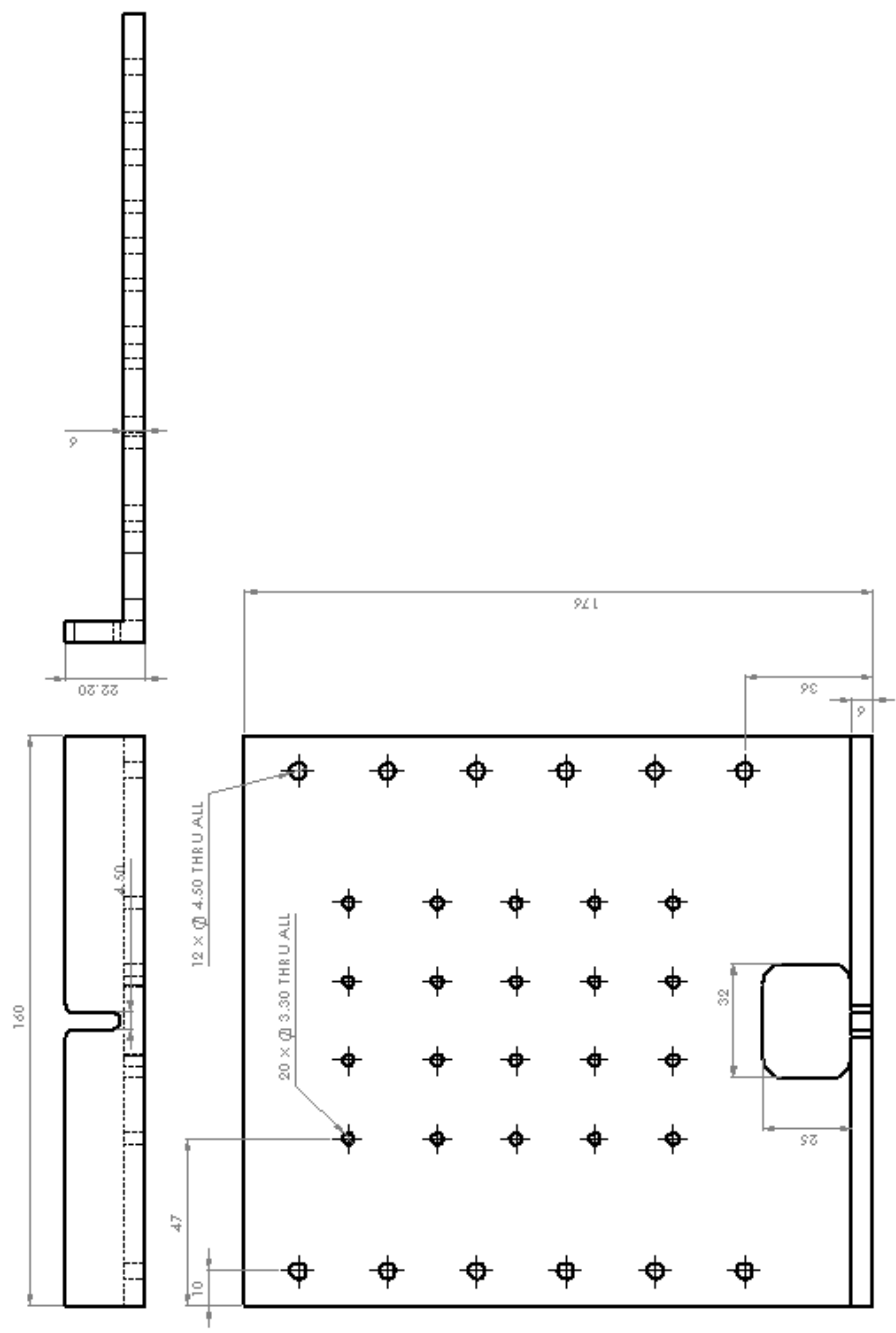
Piezo actuator to sample holder and y axis connection plate. Material Al7060.
